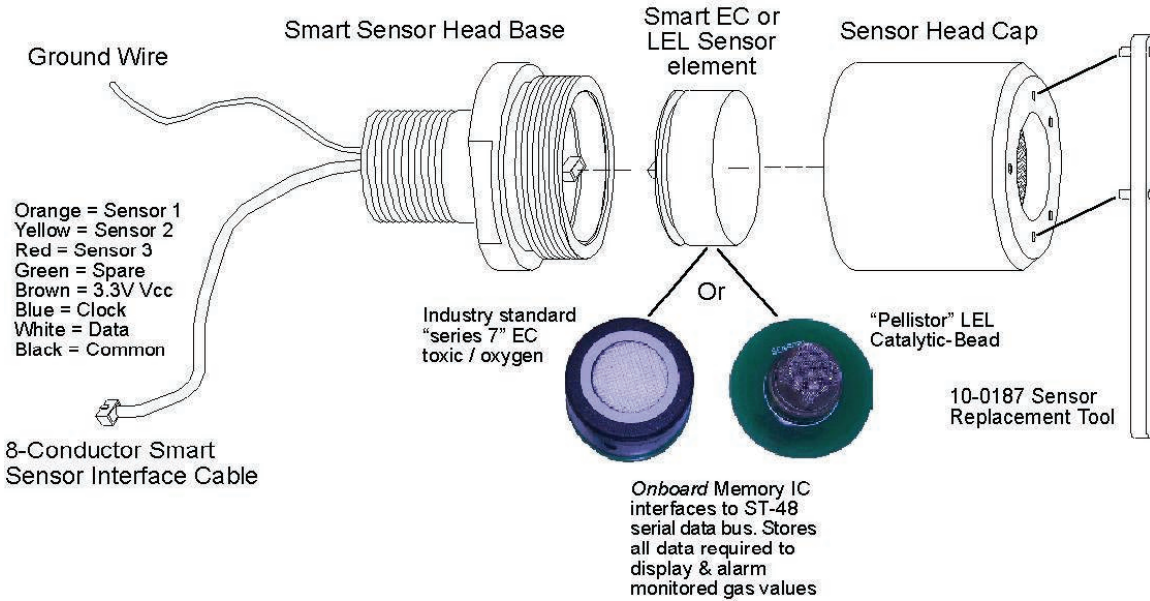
10-0247 Smart Sensor Head Assembly
